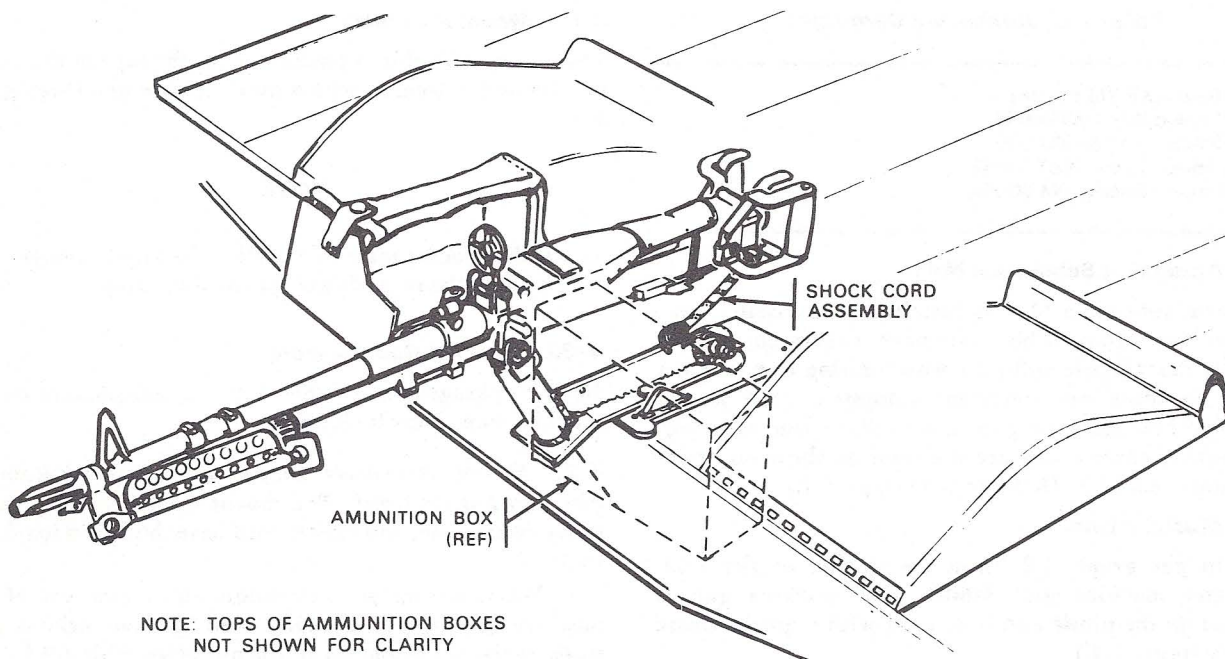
Machine Gun in Stowed Position—Right Rear View
